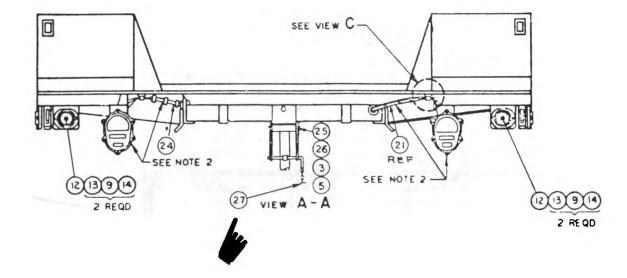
Trailer, Flatbed Assembly (Sheet 1 of 2)
